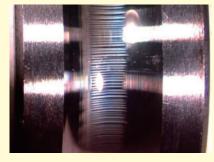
Electric pitting generated on general purpose bearings (pits)
